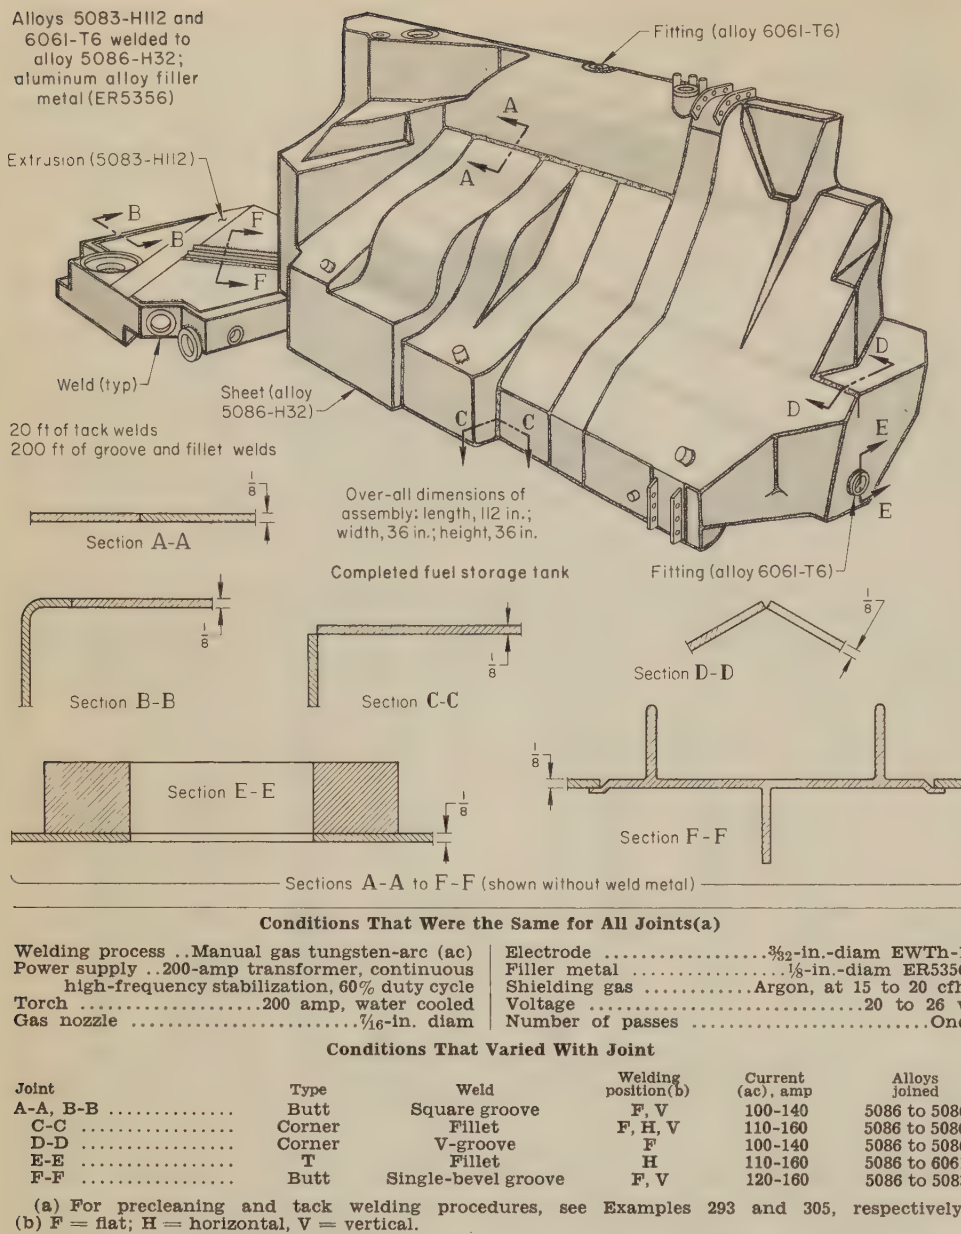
Fuel tank for an M-60 combat tank, and types of welded joints (Example 311)
